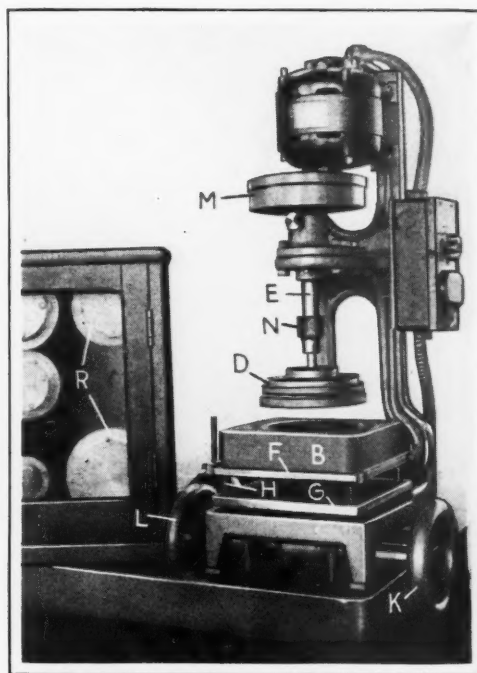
Machine for Grinding-in Locomotive Piston Packing
